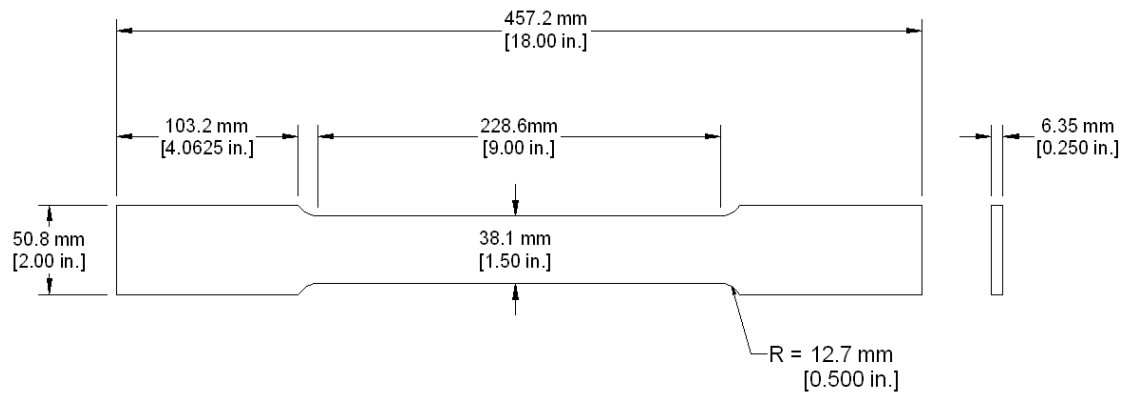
6.35 mm [0.250 in.] Standard tension specimens
